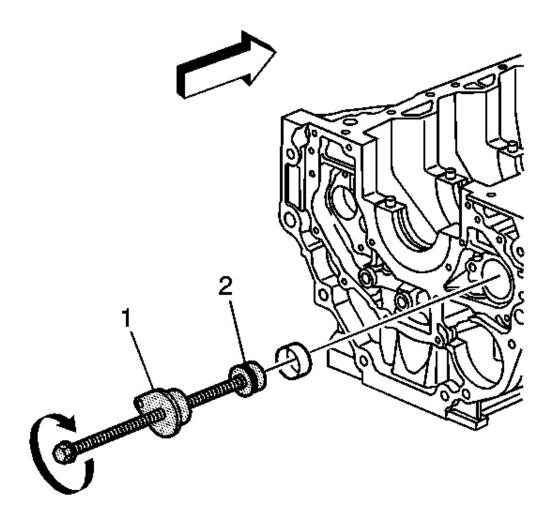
Installing Left Balance Shaft Bearing Courtesy of GENERAL MOTORS CORP.
